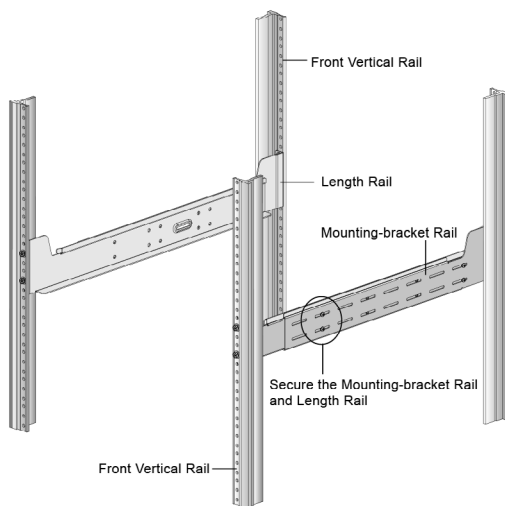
Attaching the Mounting Rails to the Cabinet
